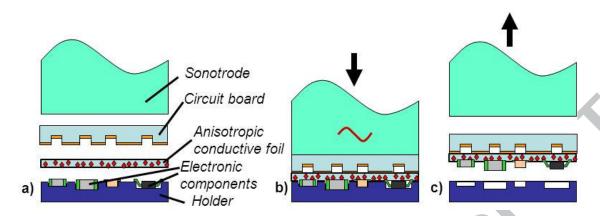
Fabrication of an electronic board by ultrasonic hot embossing and welding.
